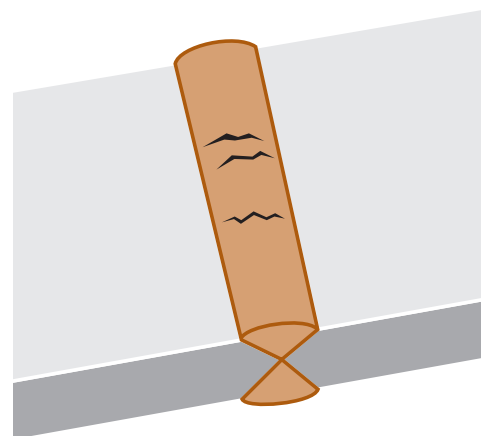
Weld sample with hydrogen assisted crack.
